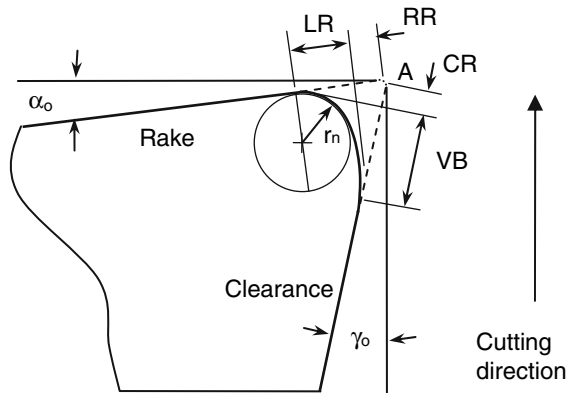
Schematic of the profile of a worn cutting edge and the various measurements that can be performed. A, initial position of an ideally sharp cutting edge; LR, width of wear land on rake face; RR, edge recession parallel to the rake face; VB: flank wear; CR: edge recession parallel to the clearance face, r_n , nose radius
